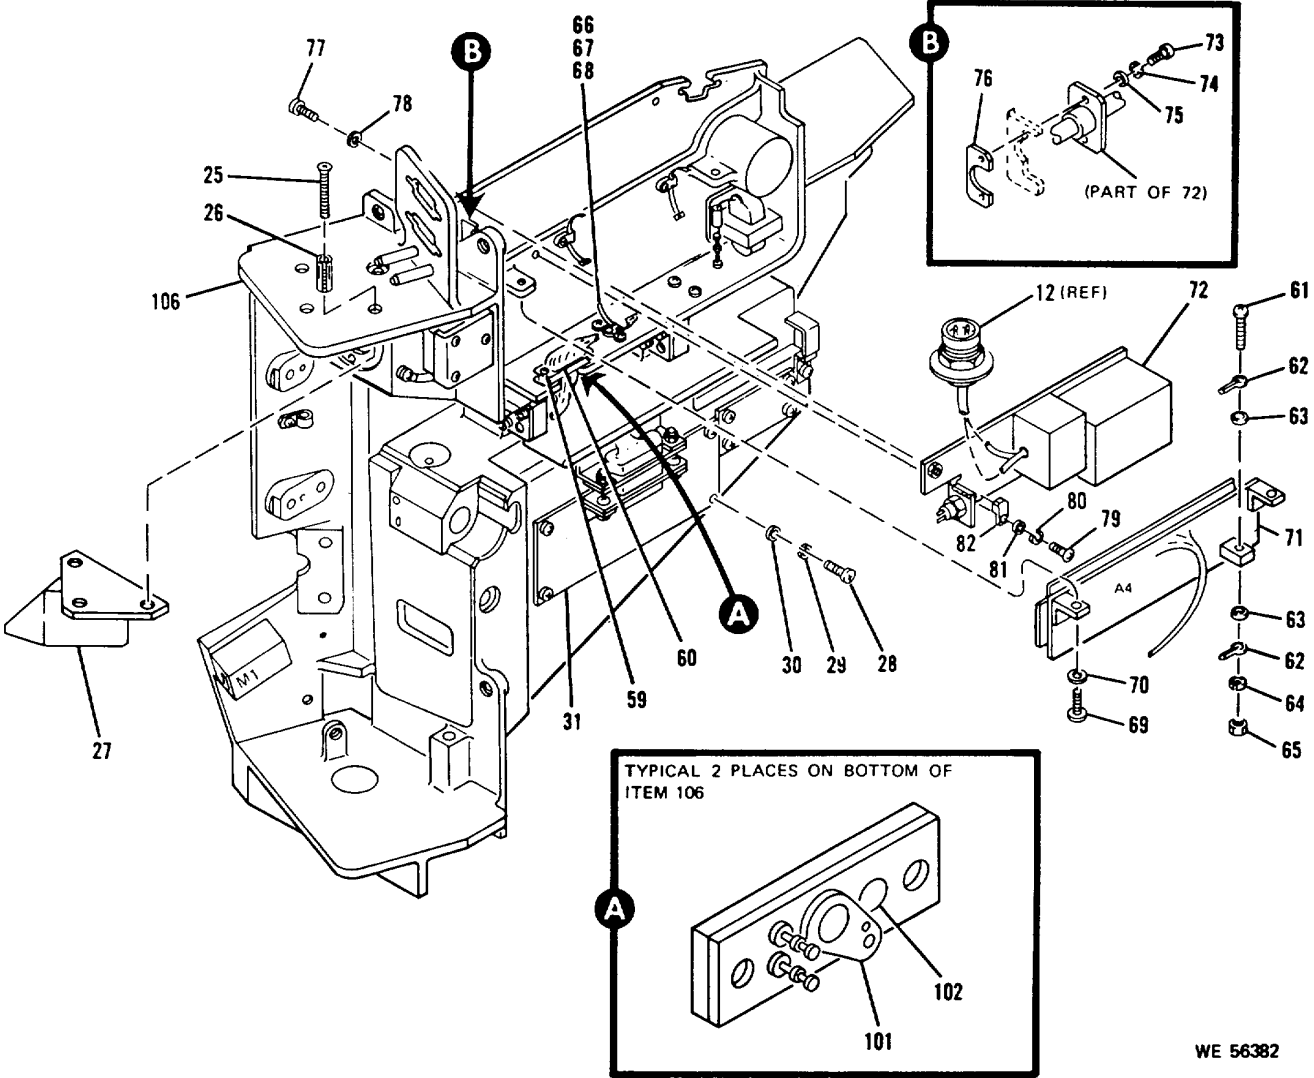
Disassembly of Laser Receiver-Transmitter RT-1021/VVG-1 (A76) (Sheet 2 of 3 sheets).
